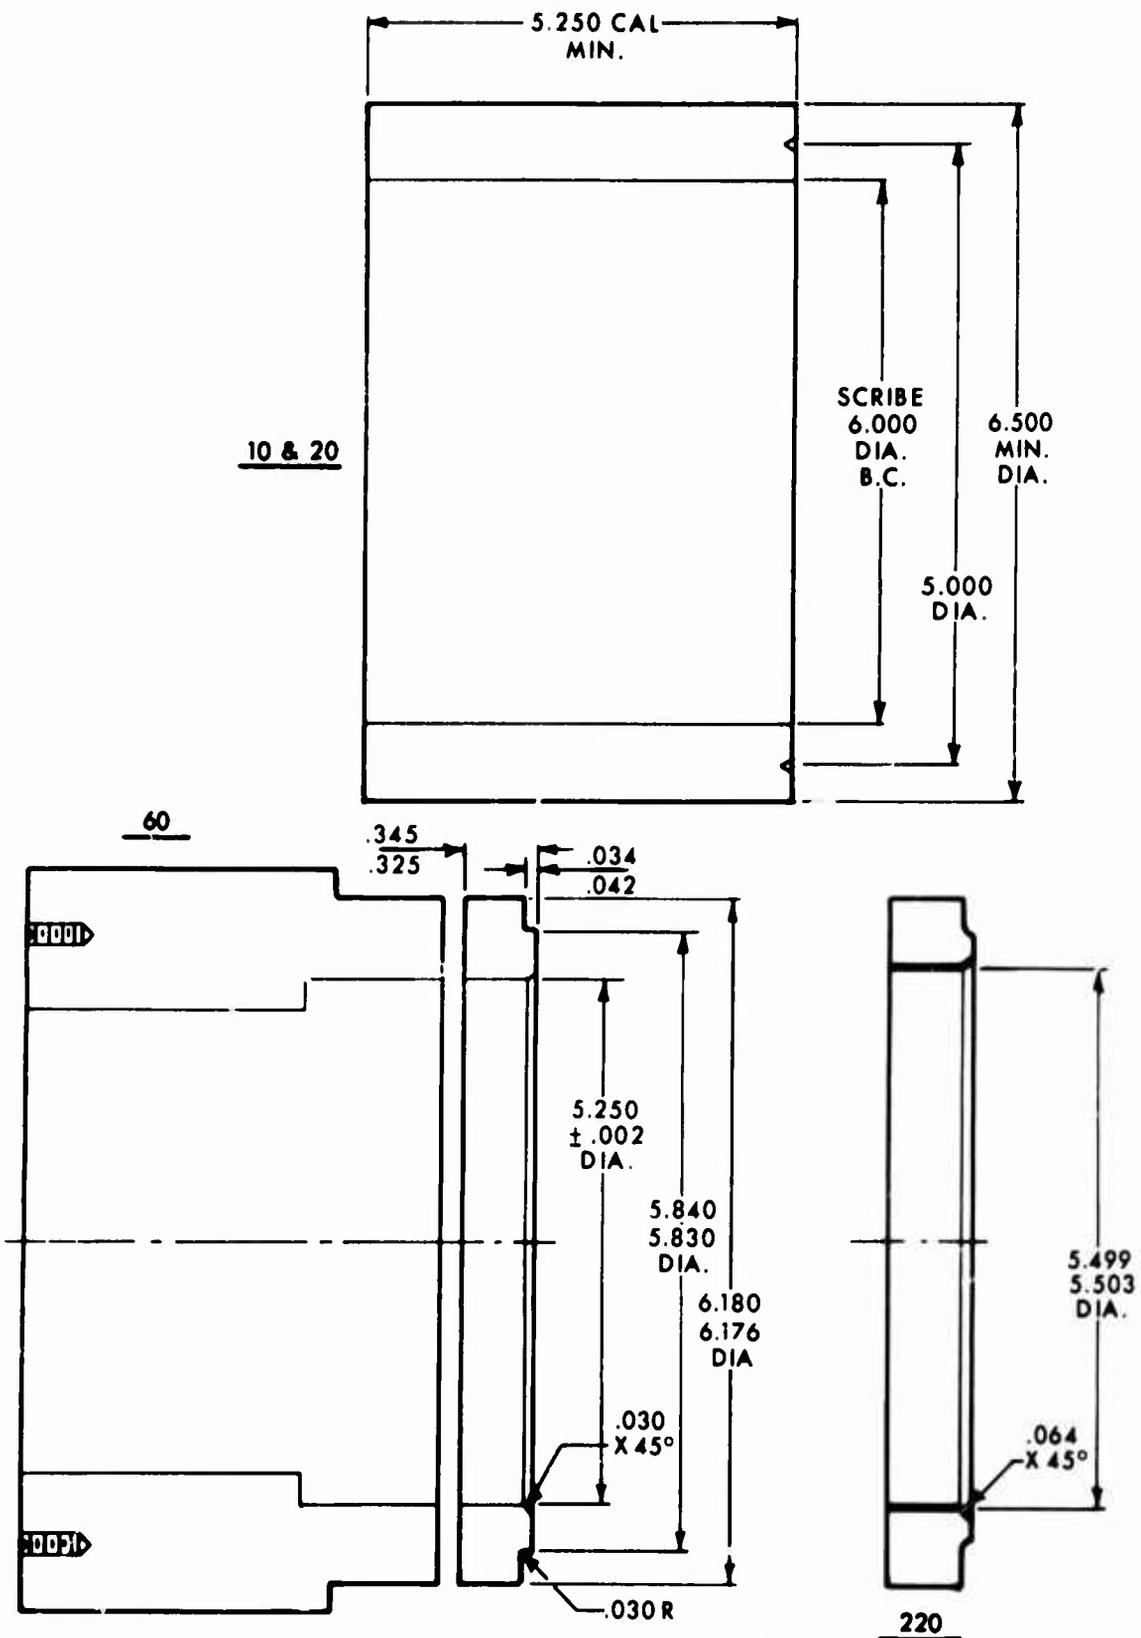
RG351-11182-103, Machine Operation Drawing.
